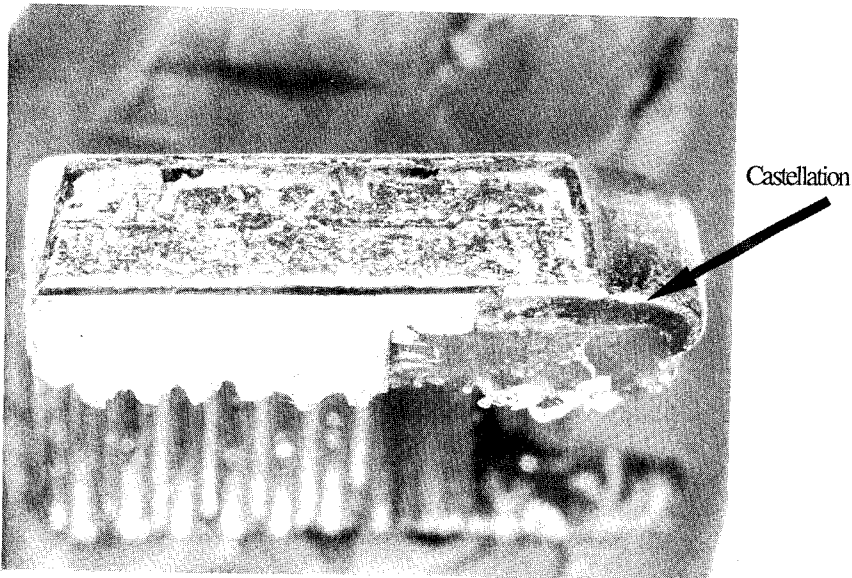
Fractograph showing the forming seam and fracture surface proximity to the castellation slot. Mag. 7.5x.
